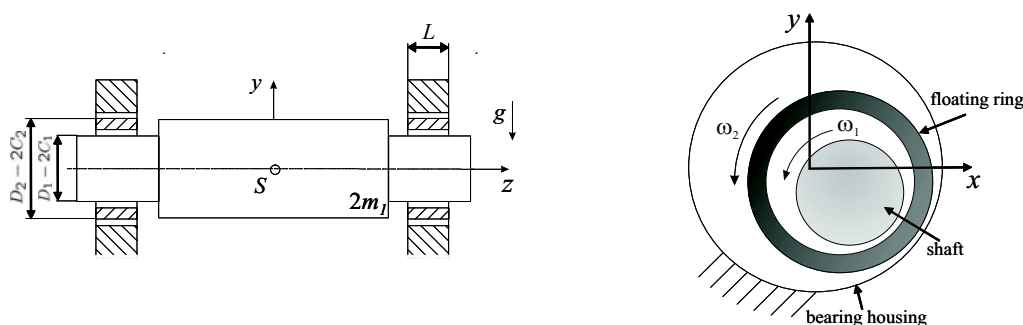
Mechanical model of a rotor supported by floating ring bearings
